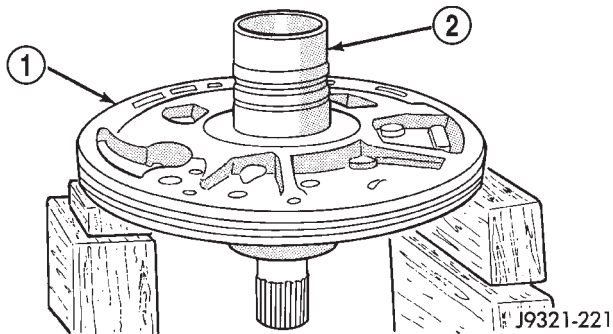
Assembling Reaction Shaft Support And Pump Housing
